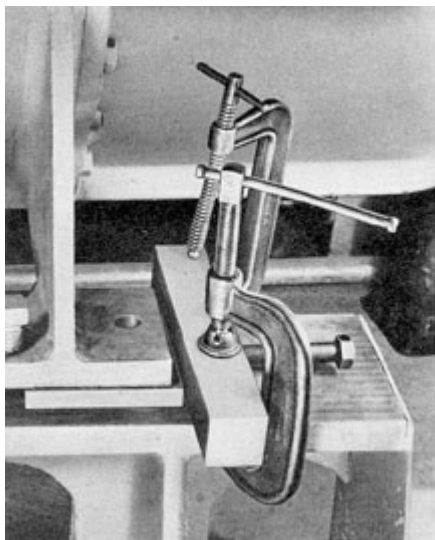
Using portable block and jack screw to adjust generator for proper thrust clearance.
